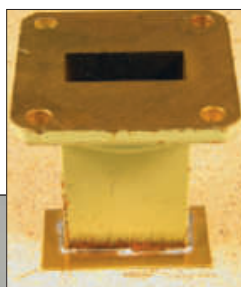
The solder on the right side is starting to melt, but solder on left has not melted and is still solid wire.
